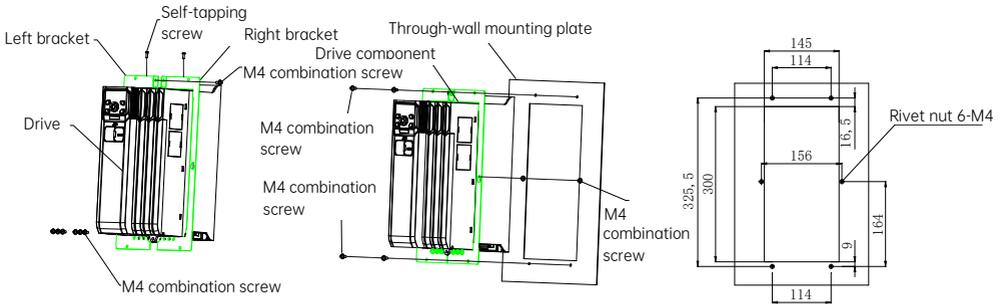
MV810-EMBD embedded mounting bracket kit
